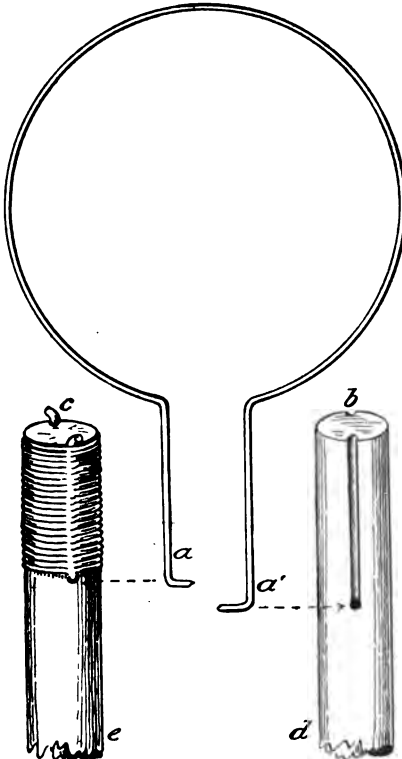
Homemade ring and handle: *a a'*, ring; *b*, stick showing grooves ending in hole; *c*, wire inserted in groove and hole, and wrapped with twine.
